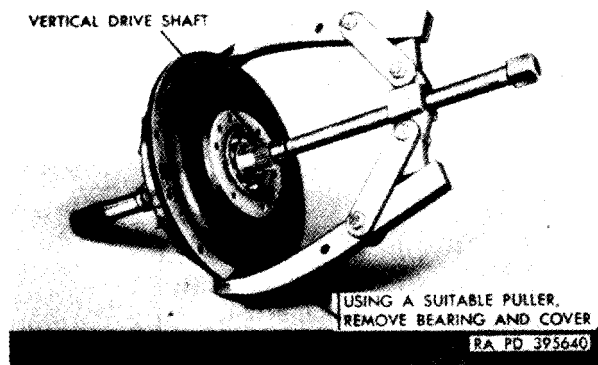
Removing clutch cover and fan drive vertical shaft bearing using puller.
